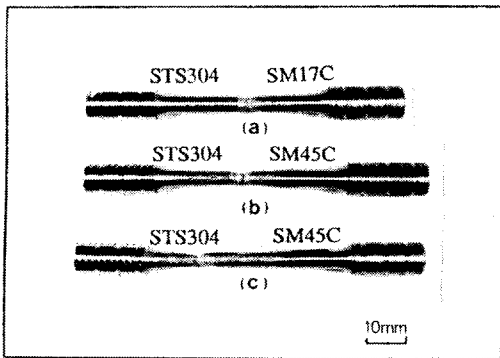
Macro photographs of tensile test specimen(bonding condition 1473K×2.5ks)
